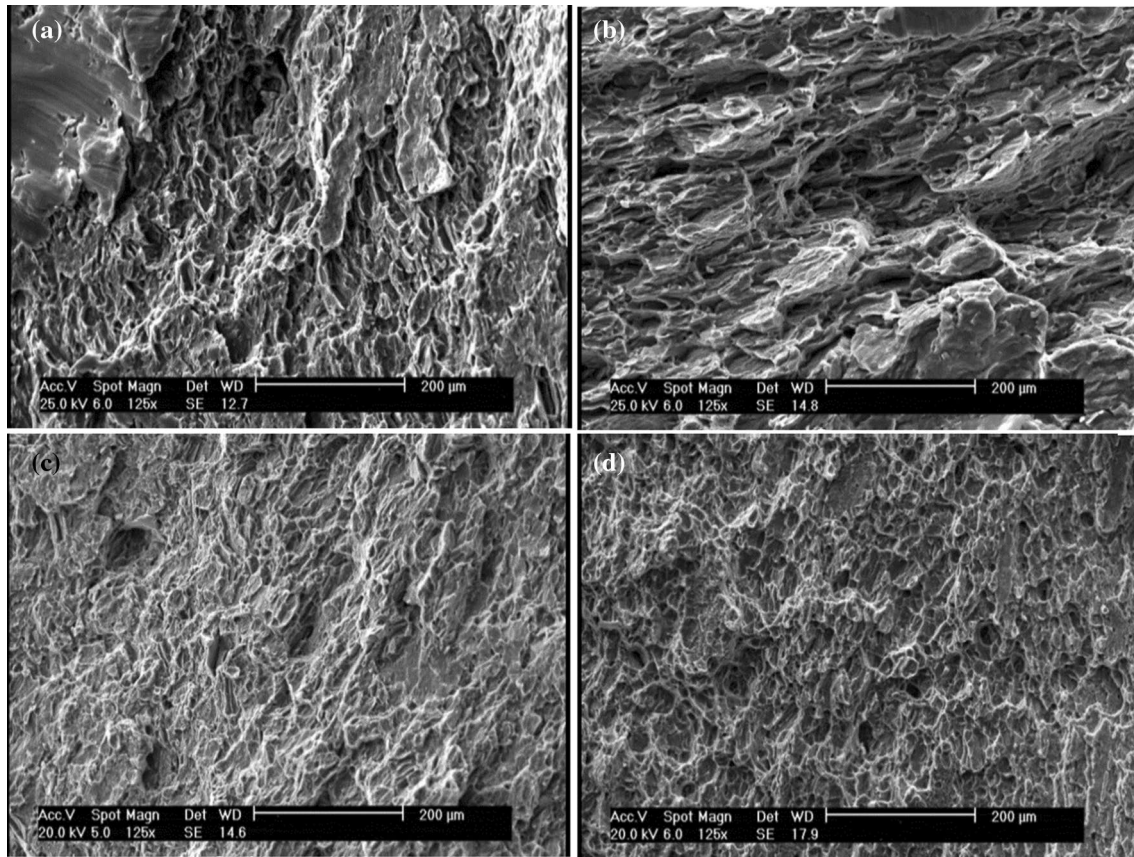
Fracture surfaces of the studied specimens relating to the different welding conditions, a FSSW, b FSSVW, c FSSW+coolant, and d FSSVW+coolant
